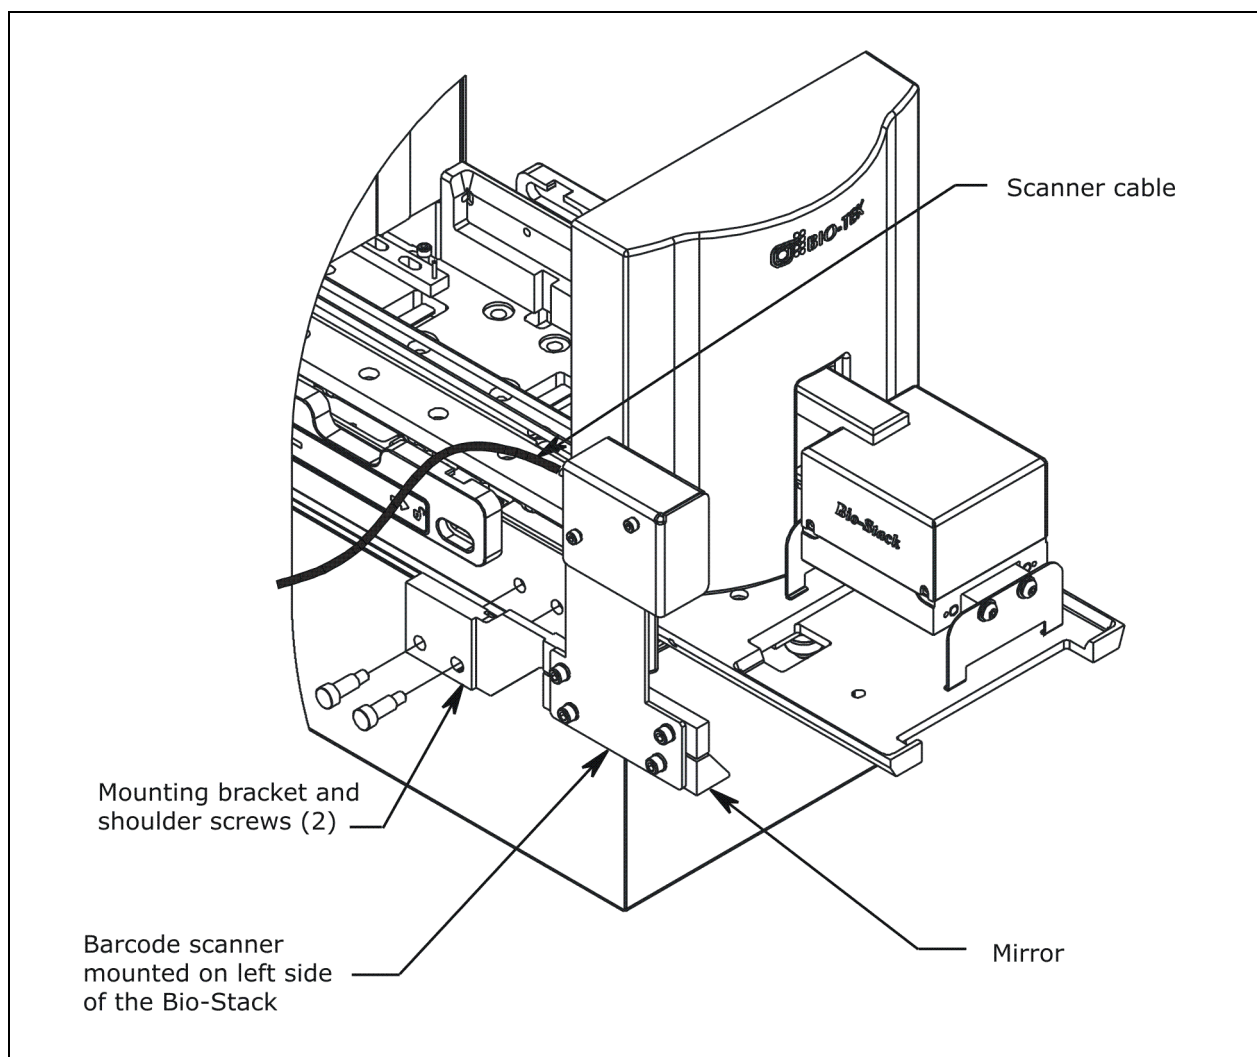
Reattaching the Scanner to the Mounting Bracket for Left Side Installation
